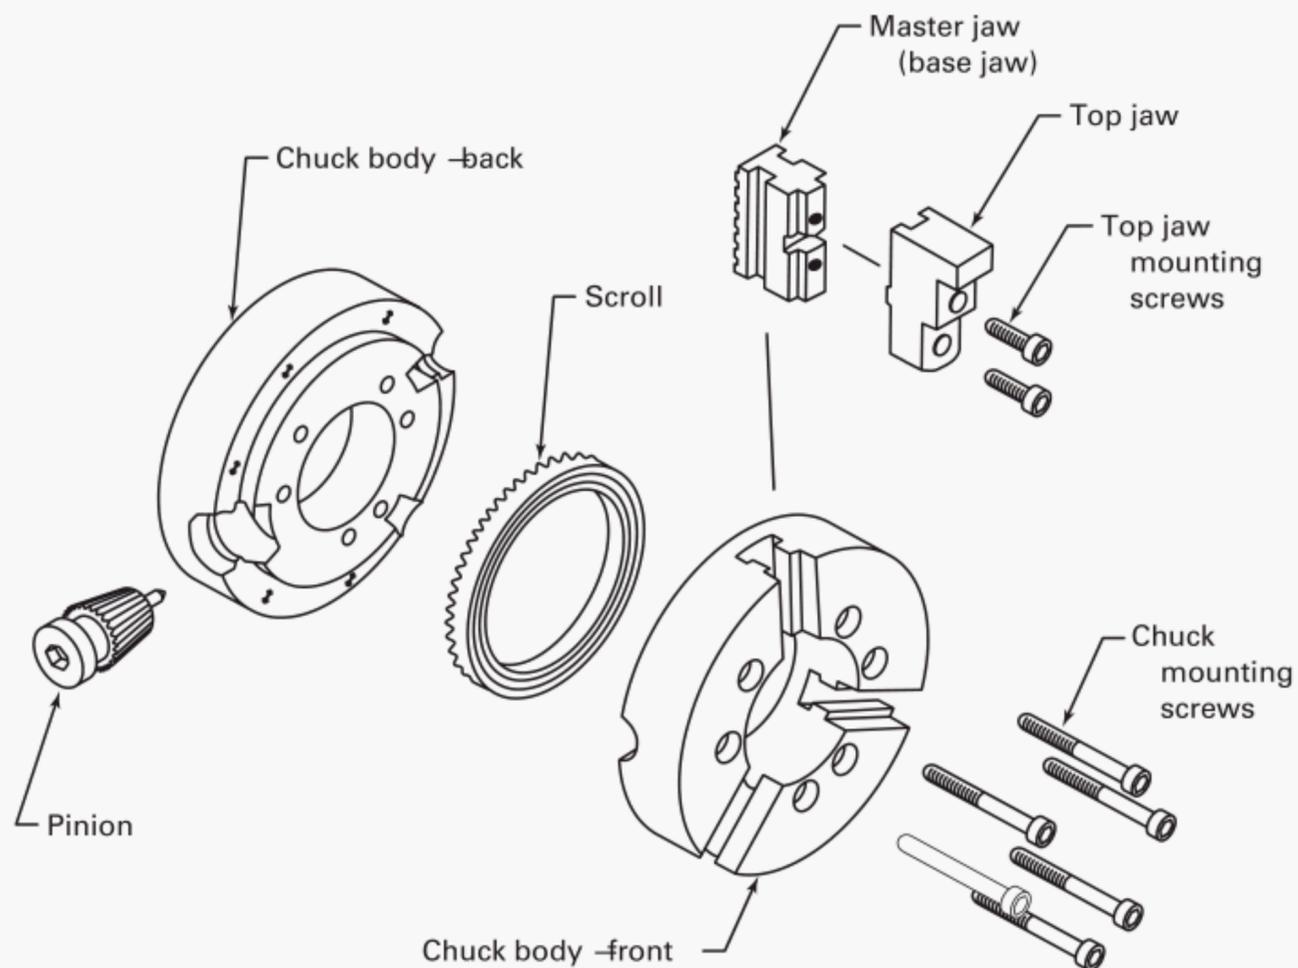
EXPLODED VIEW OF A TYPICAL MANUAL CHUCK
